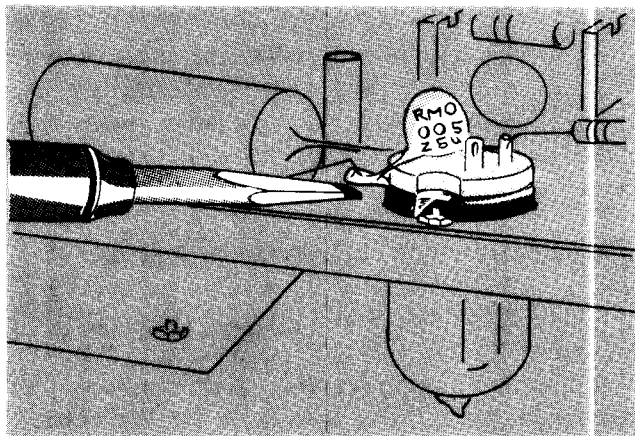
Soldering to a terminal. Note the slight fillet of solder--exaggerated for clarity--formed around the wire.
